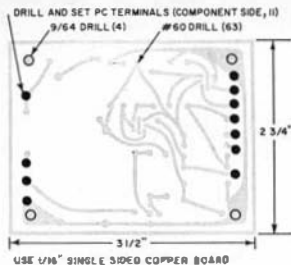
(above). Drilling details for the printed board. Actual-size board is shown on page 98.
